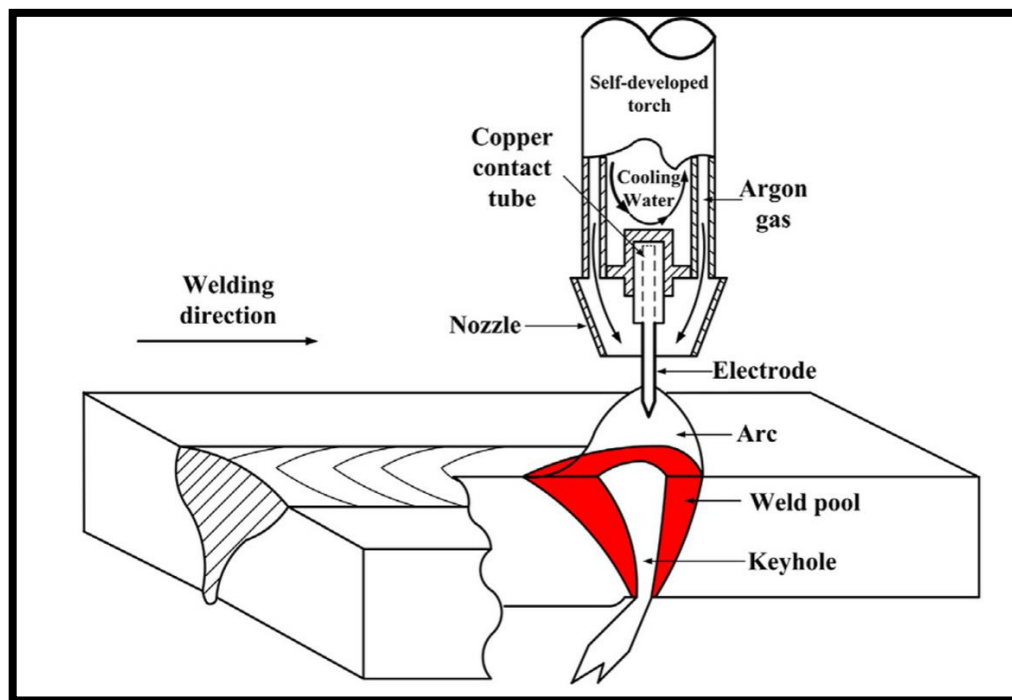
Gas tungsten arc welding (GTAW) process [21].
